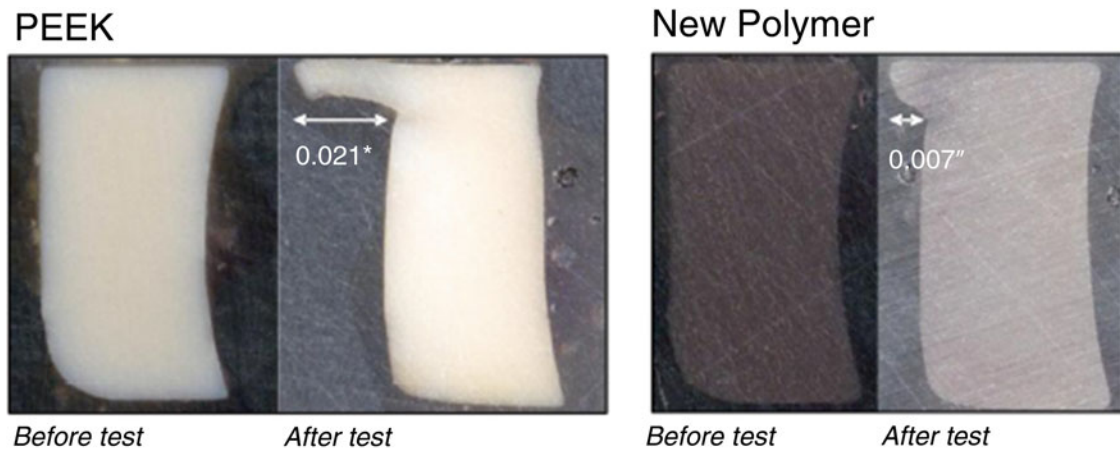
Cross-section view of concave design back-up rings before and after testing [10]
